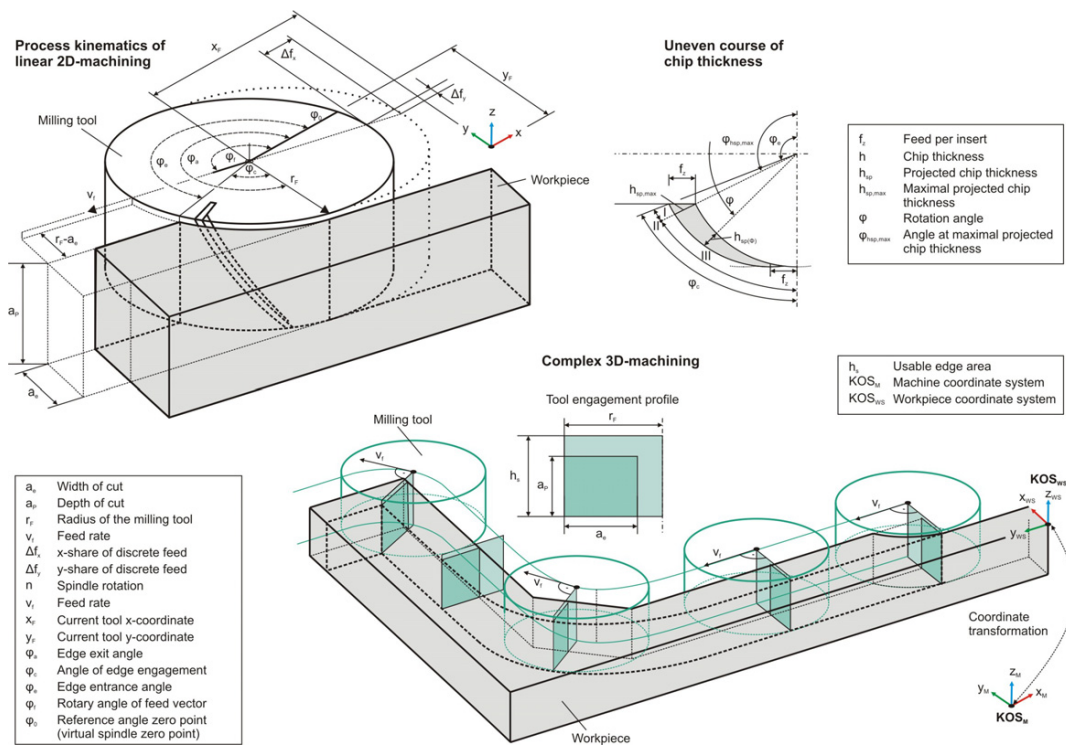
Tool and edge engagement conditions and process kinematics in linear 2D and complex 3D machining operations; uneven course of chip thickness (exemplary straight face milling of cuboids); tool engagement profile in complex milling operations within curved 3D trajectories
